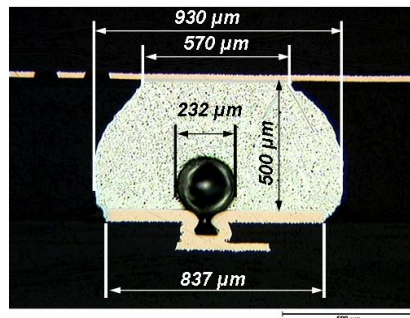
Dimensions and relations of a typical void in a BGA solder joint
